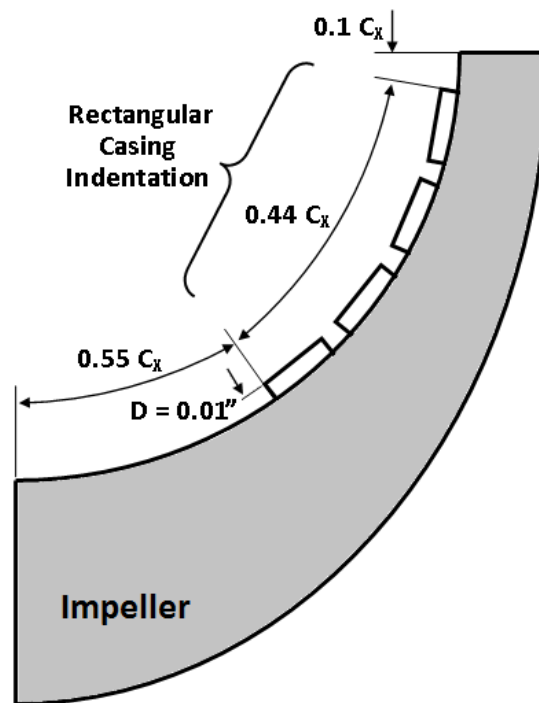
Schematic drawing of the cross sectional view and the dimensions of the rectangular shaped casing indentation design of impeller blade
